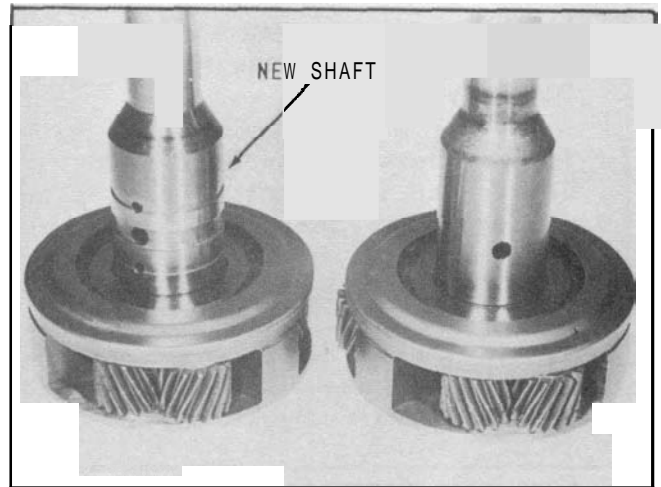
Late and Early Model Pinion Cage and Output Shafts
